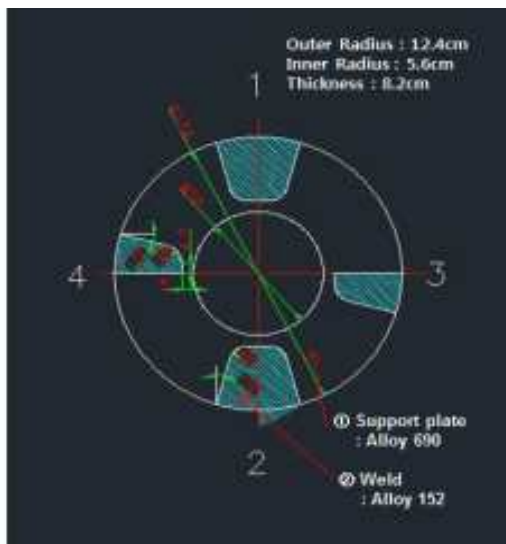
Geometry and welding passes of specimen[2]
